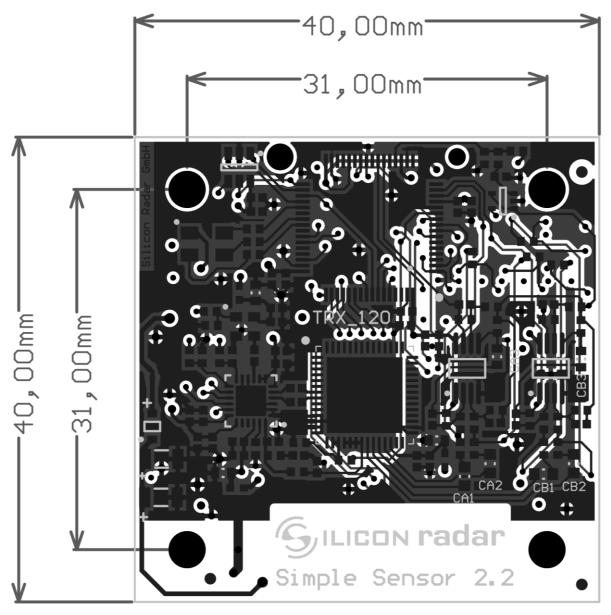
Mechanical drawing of the SiRad Simple® Evaluation Kit
